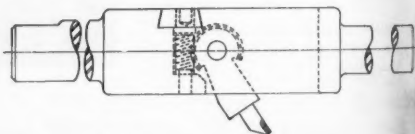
Boring bar in which segmental worm wheel and tool holder is used.
